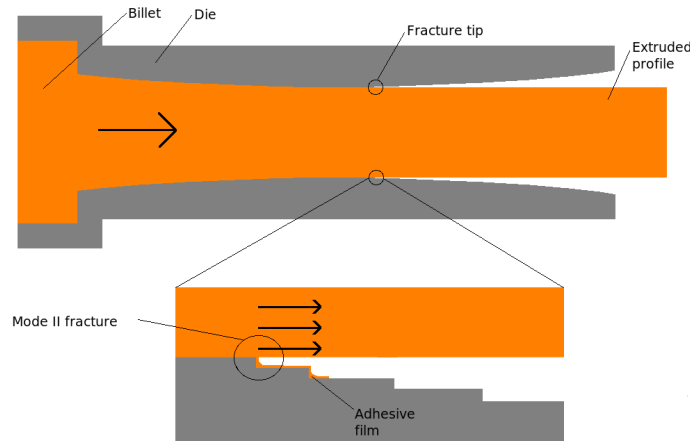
Schematic cross-sectional view of the extrusion die. This view is perpendicular to the viewing angle used in the optical image in Figure 1.4. The point where the extruded material slips from the die wall, and forms a profile, can be compared with the opening of a sliding mode II fracture. The magnified drawing illustrates an adhesive film that forms on the bearing surface during extrusion.
